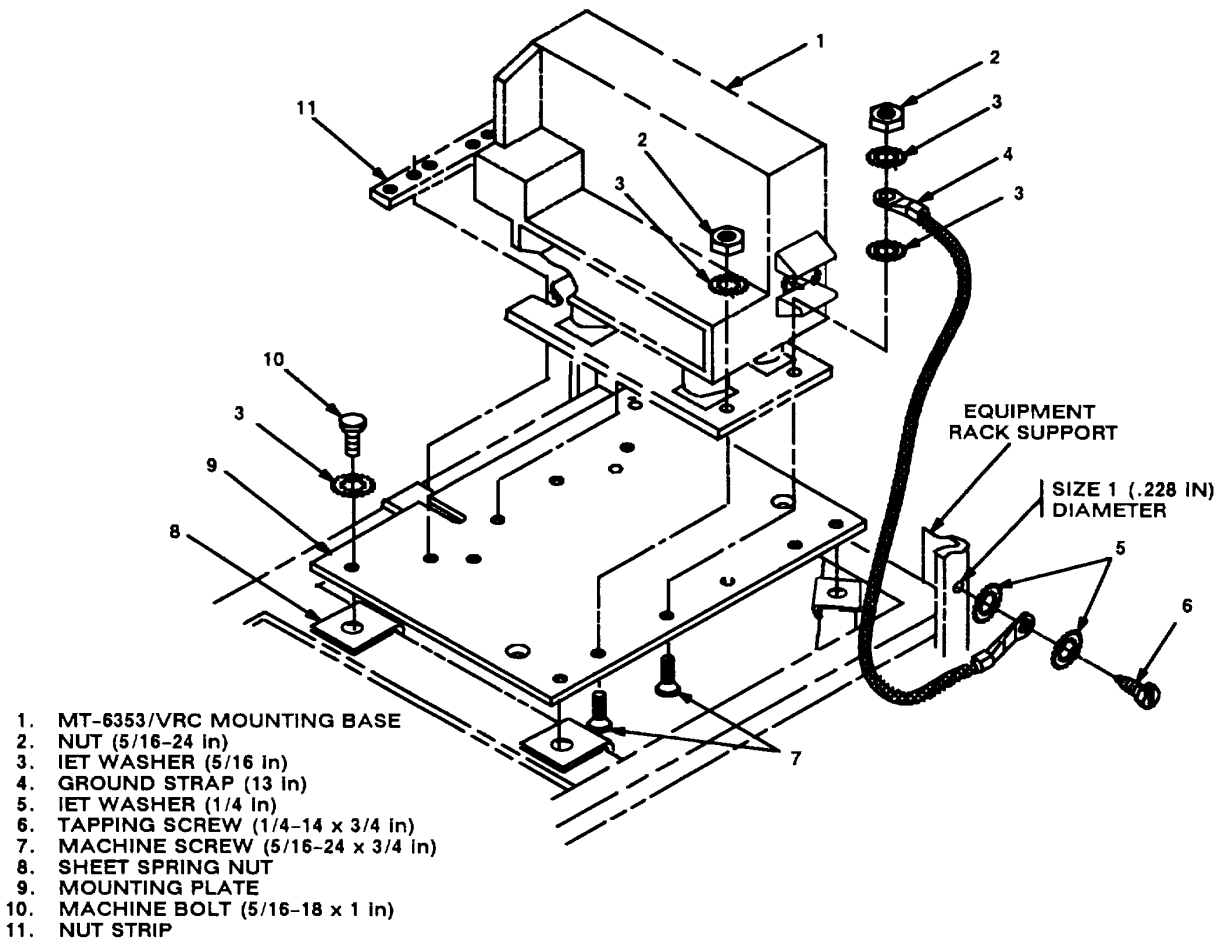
MT-6353/VRC Mounting Base Installation: Equipment Rack Shelf
